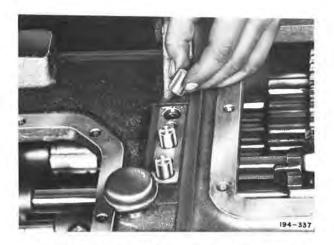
Installing Shift Rail Poppet Ball Pins
